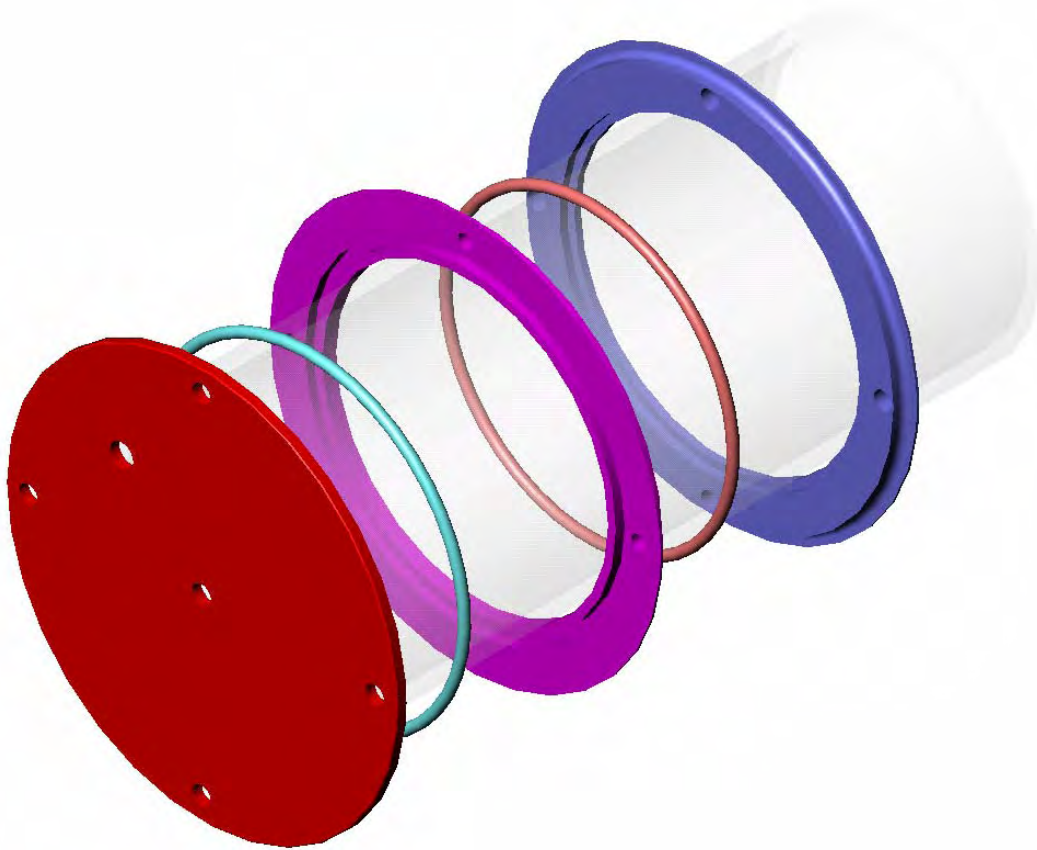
Solid Works CAD assembly image of custom-made stainless steel flanges and lids.
